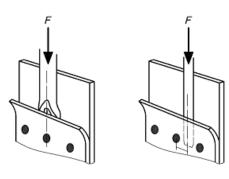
Details including plastic wear plates, due to friction welding electrodes.
